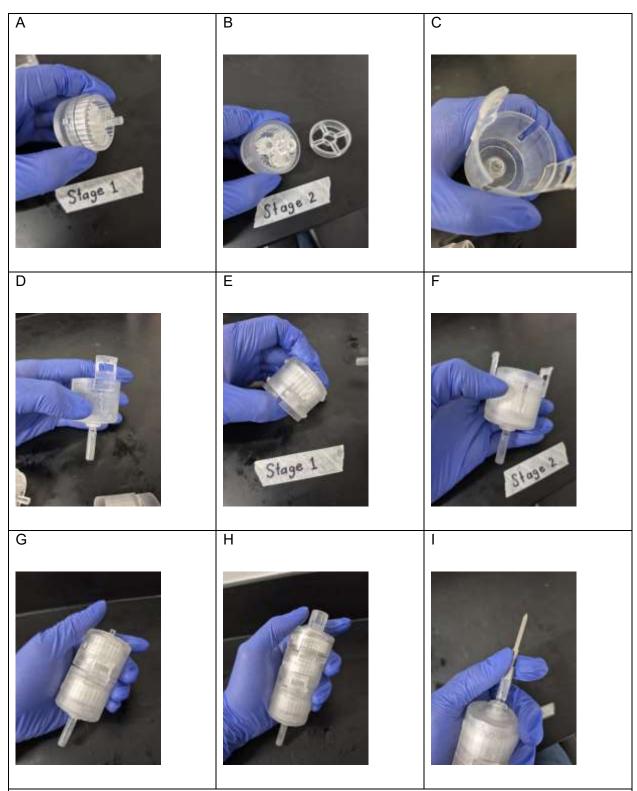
| Assembling the Kepler driver. a, b. Inserting the Stage 1 gear system into the top casing (a) and the Stage 2 gear into the bottom casing (b). c, d. Inserting the bit adapter piece into the bottom casing shell (c). The bit adapter stays in place inside the bottom casing shell if placed correctly (d) e, f. Inserting the Stage 1 (e) and Stage 2 (f) gear assemblies into their respective shells. g. Mating of the Stage 1 and Stage 2 gear assemblies by snapping their
